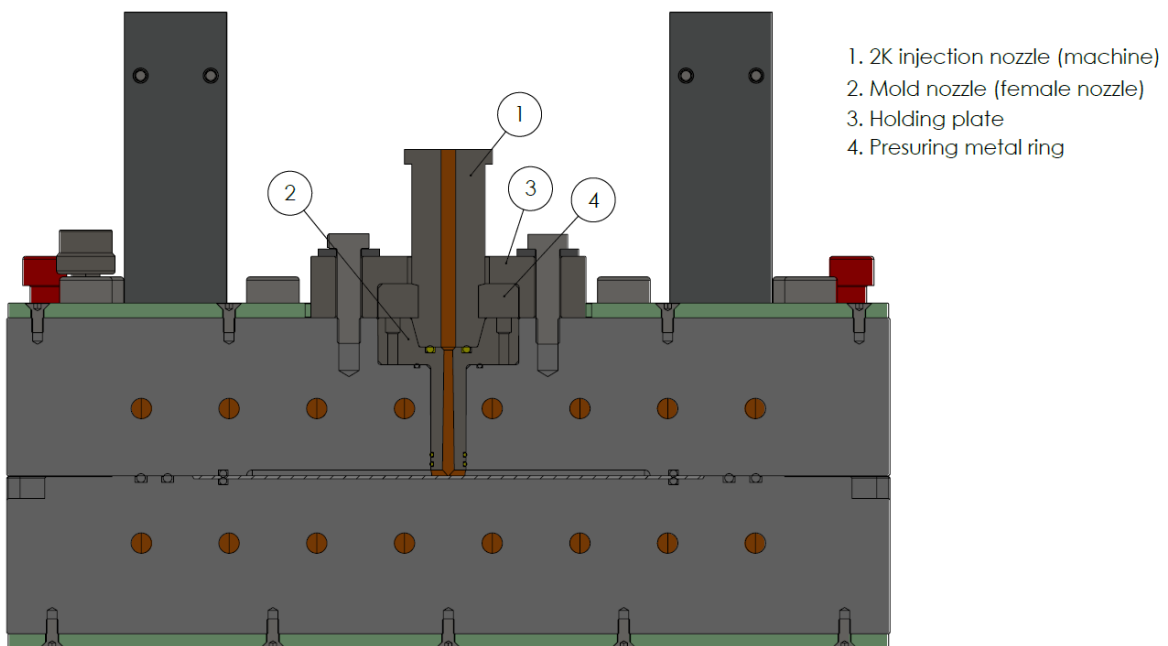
Detail of the mixhead connection into the mold. bi-component injection configuration
